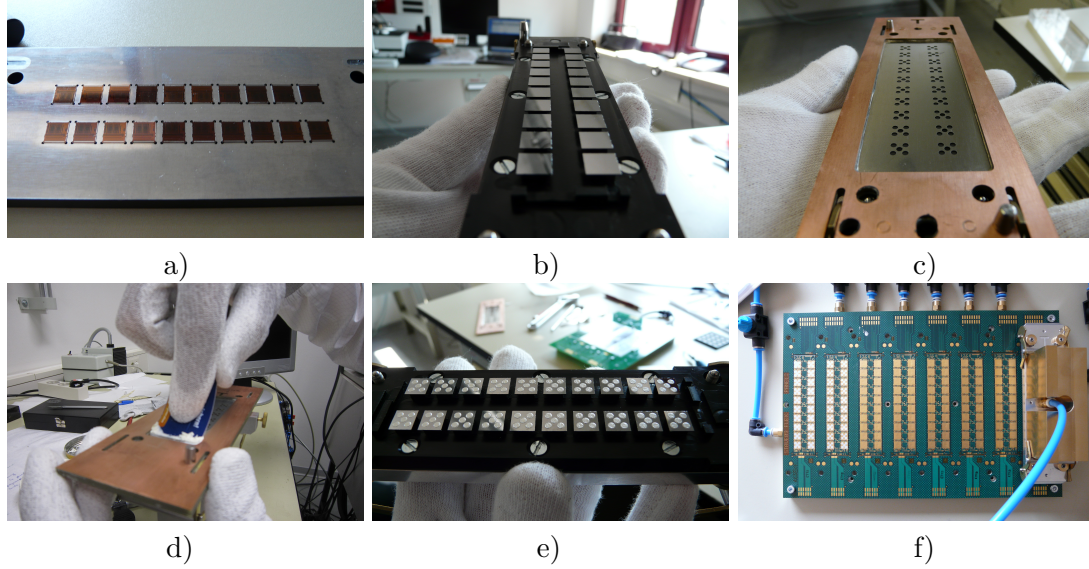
The different steps and tools involved in the glueing process for attaching 20 readout ASICs onto hybrids for barrel modules. The ASICs are positioned in a chip tray (a), picked up with a vacuum tool (b) on which subsequently a glue mask is attached (c). The glue is applied through the mask openings onto the ASICs back side (d), after which the mask is removed (e) and the ASICs are placed onto one of eight hybrids on a panel attached to a vacuum jig for curing (f).
